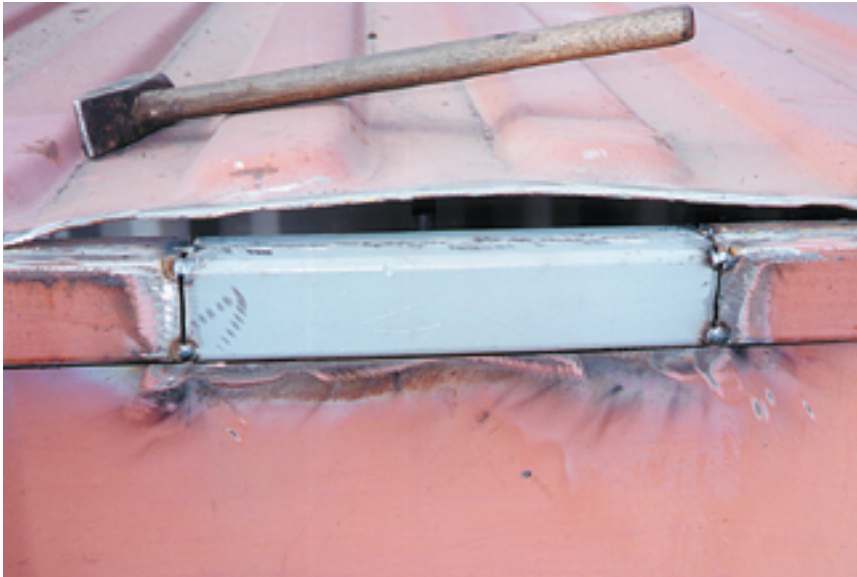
(to left) / Tube-type top side rail section tack-welded into position
